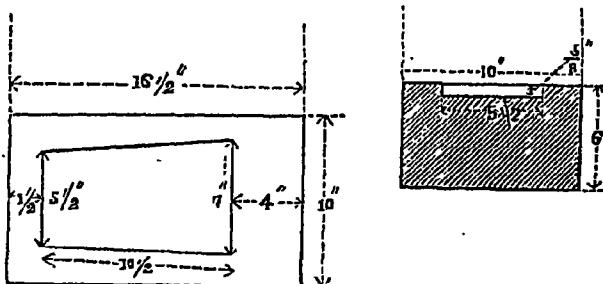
shows a dimensioned plan of a mould for making pot or pan tiles. Scale = $\frac{1}{12}$.
